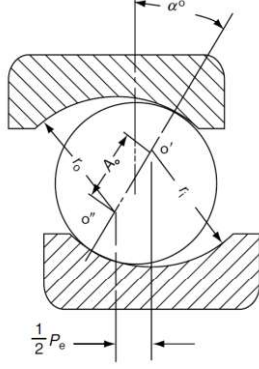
Section View of a Ball Bearing Showing Ball-Race Contact [9]
